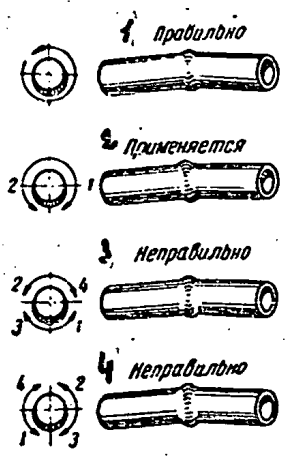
Correct and wrong working order of tube butt-welding
